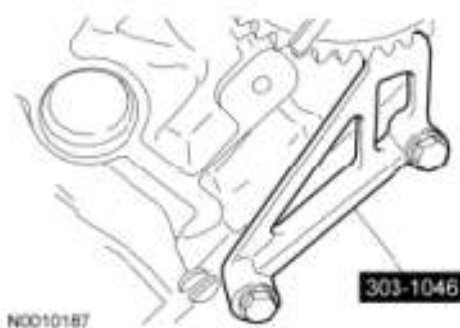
Identifying Cam Phaser Locking Tool (303-1046)
